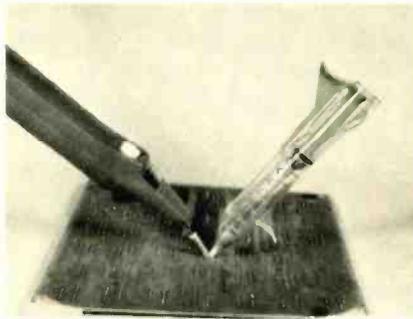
VACUUM "GUN" is spring loaded and produces a strong vacuum.
